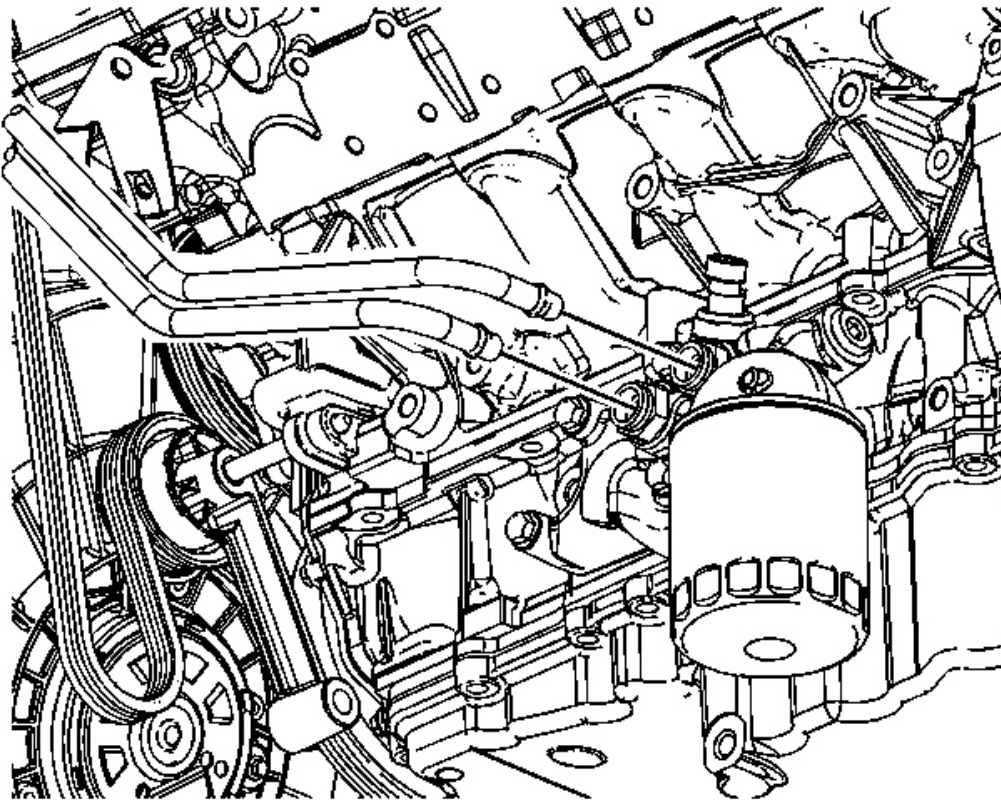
View Of Engine Oil Cooler Hose/Pipe & Clip
